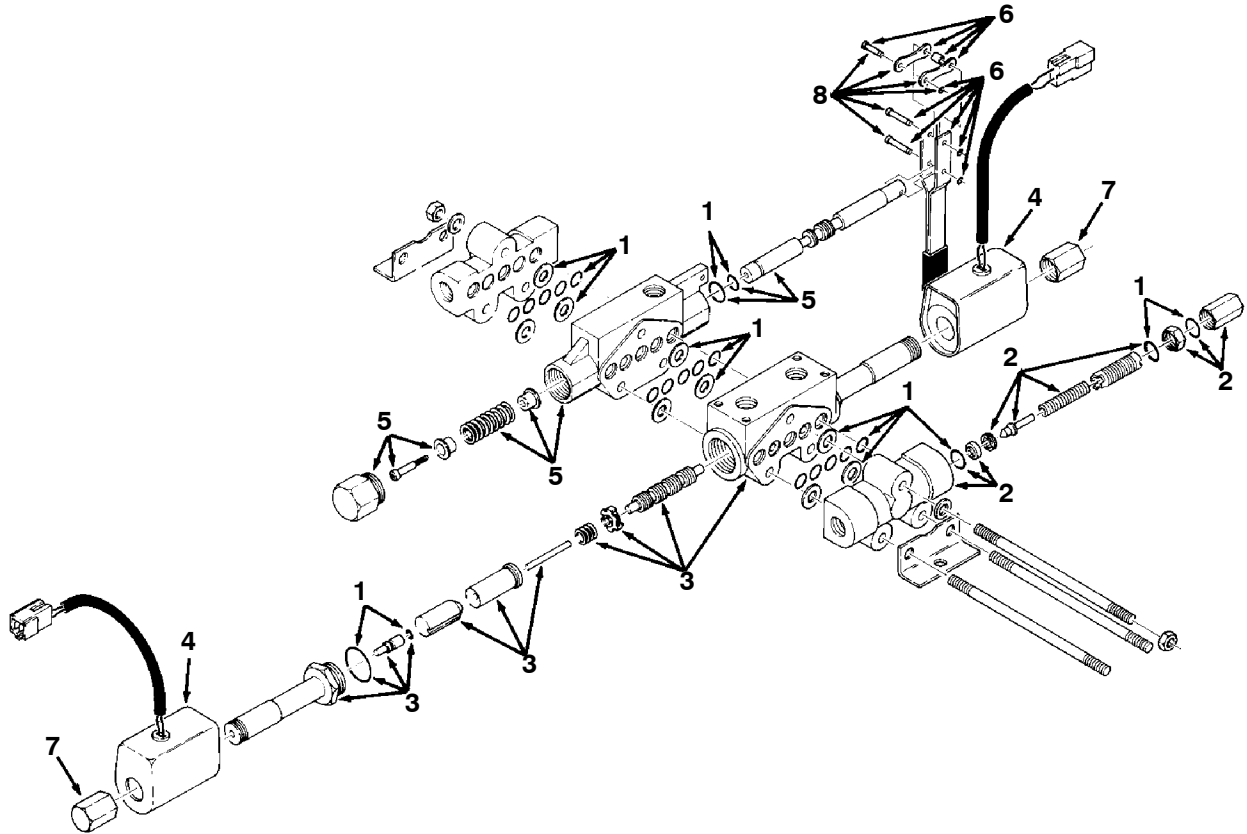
Hydraulic Steering Valve Breakdown, 74176
